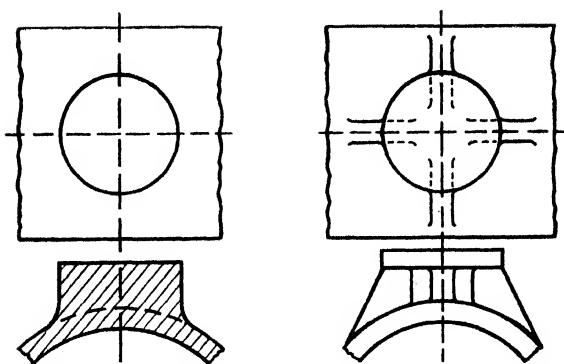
Designs for bolting or bearing bosses. That at left is poor because of the thickened section at the boss. That at right is good, even though it involves the use of cores, because it promotes section uniformity.
